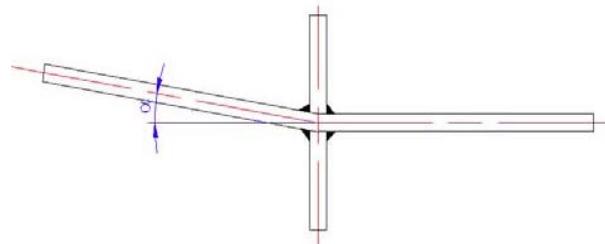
Distortion angle on the specimen after the weld process.
